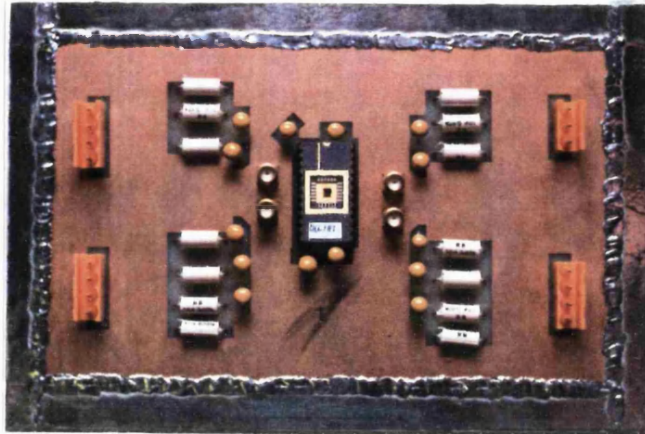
Top side of a typical PCB used for testing the OS/H circuits.
